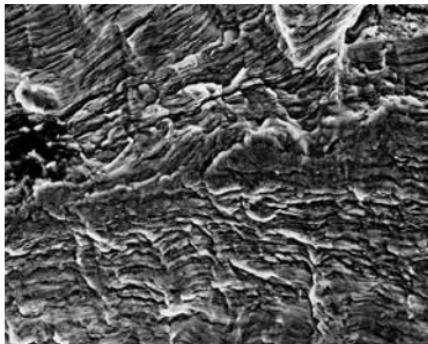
Fatigue fracture under the scanning electron microscope
